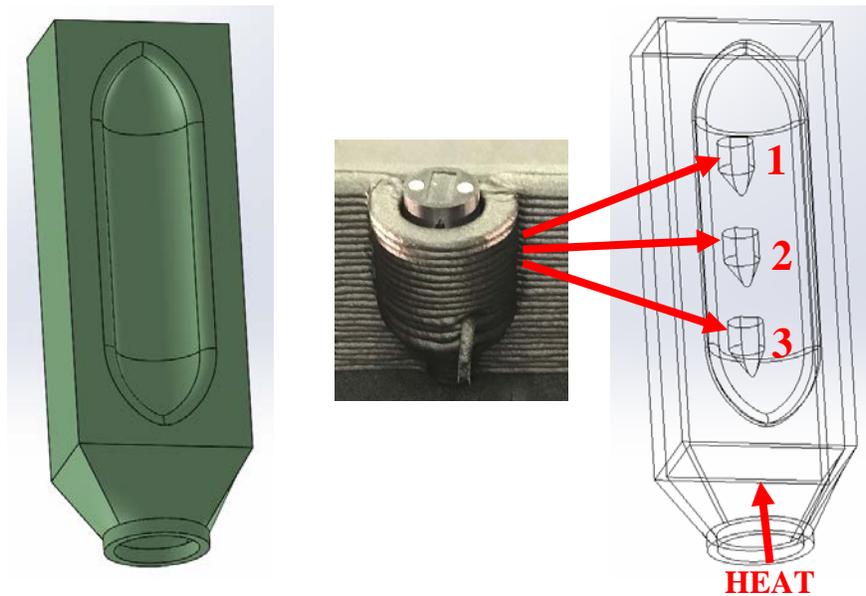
CAD of tooling with sensor module cup locations. Sensor 1 is furthest from heat source, and sensor 3 is closest.
